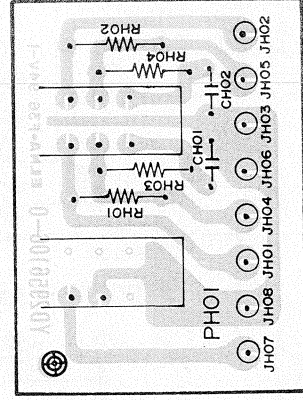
Muting Hi Filter Assembly (PH01) Component Locations
